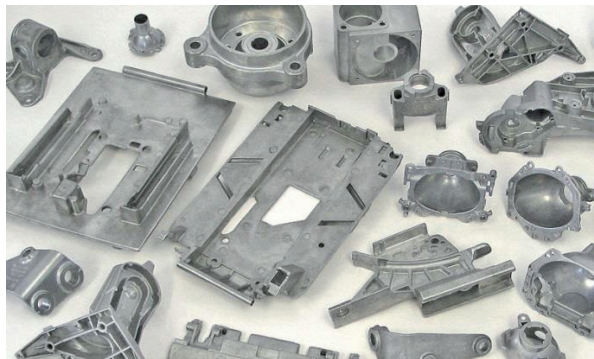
Aluminium alloy castings produced by high pressure die casting [1].
